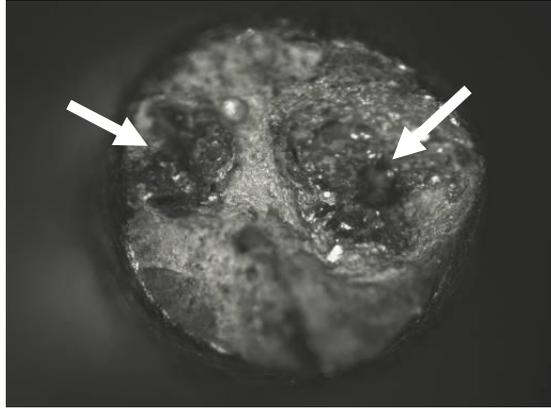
Image of the fracture surface in specimen SD 10B showing porosity in the weld metal
